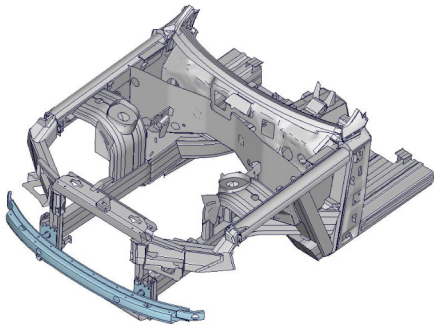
Aluminum front end structure to be redesigned with CFRP components.
